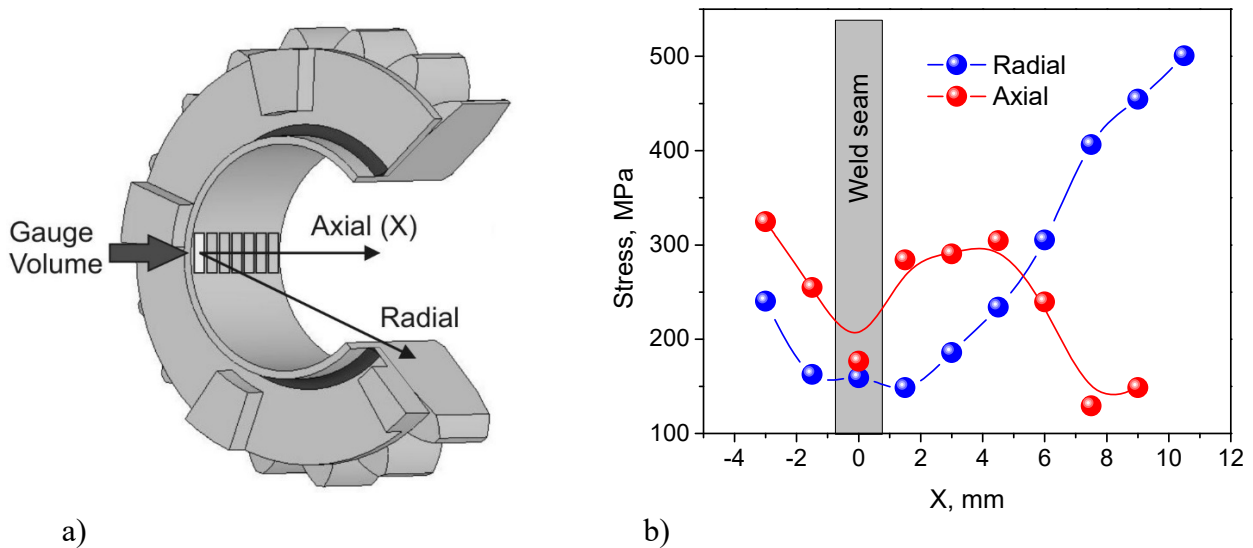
a) Scheme of residual stress measurement in gear wheel sample. b) Residual stress distribution in the sample.
